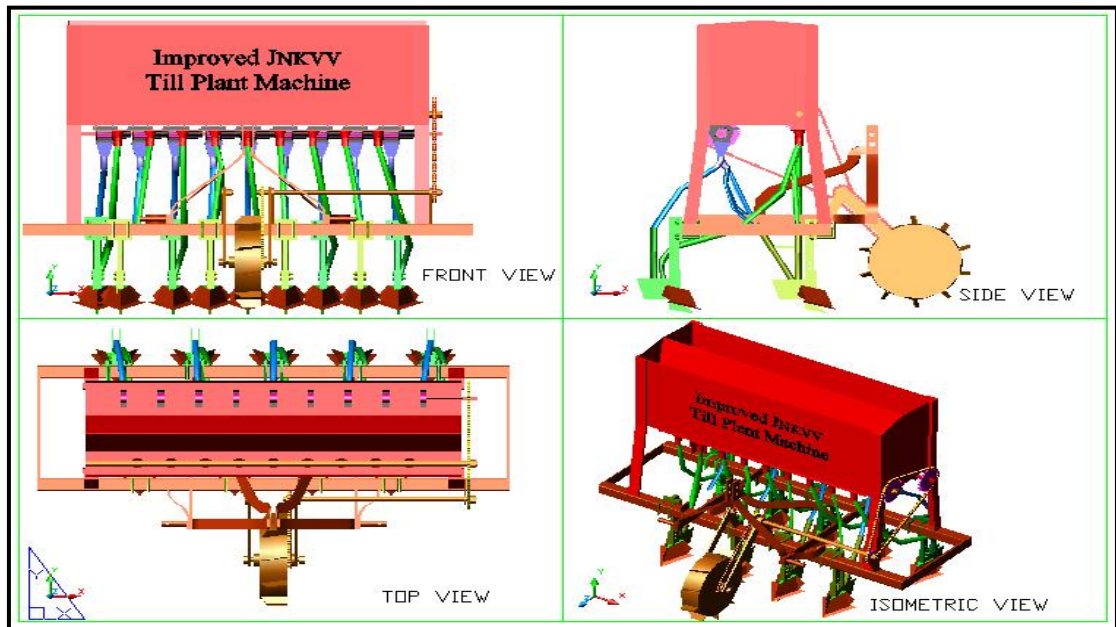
Isometric and orthographic view of the complete Improved Till Plant Machine
